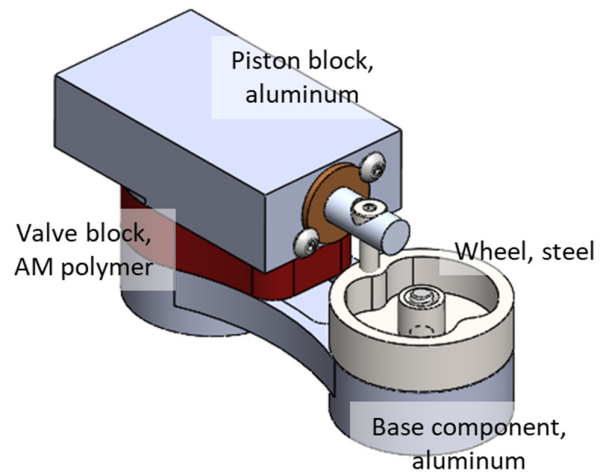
Oscillating piston air engine produced during in-person CNC machining training.
